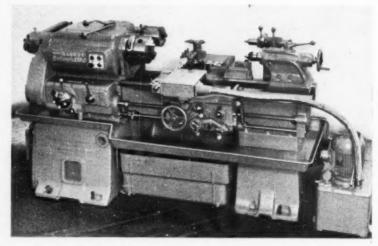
Maxnovo Profilomatic 350-22 rotating-master hydraulic copying lathe for operations on dies and moulds
